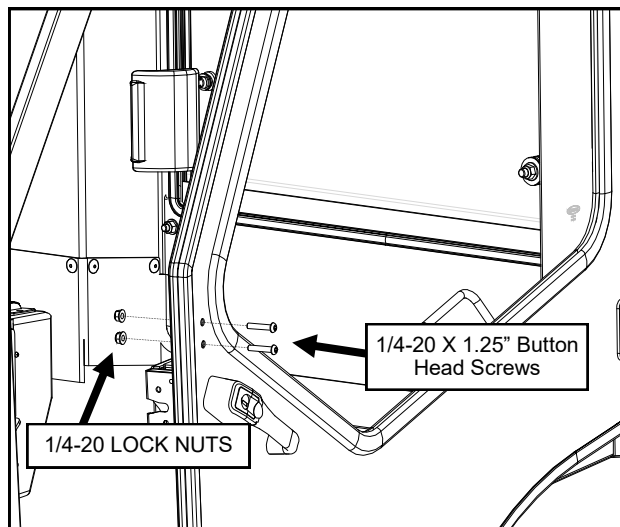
(Install Screws to Plug Mirror Mounting Holes)
